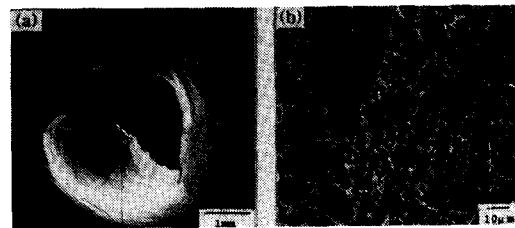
SEM macro- and micro-fractographs observed from TW.M1.5 weld metal specimens near the fusion line in TIG weldments at 4K, showing fracture morphology in (a), and fracture surface in (b).
